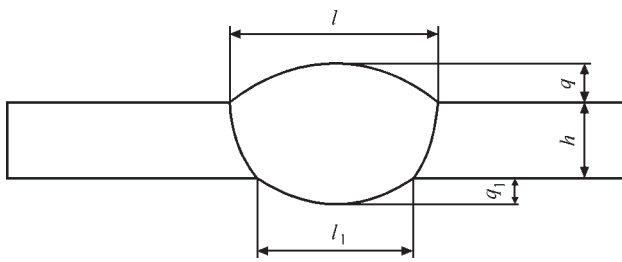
Scheme of measuring geometric dimensions of welds to calculate its form factor
